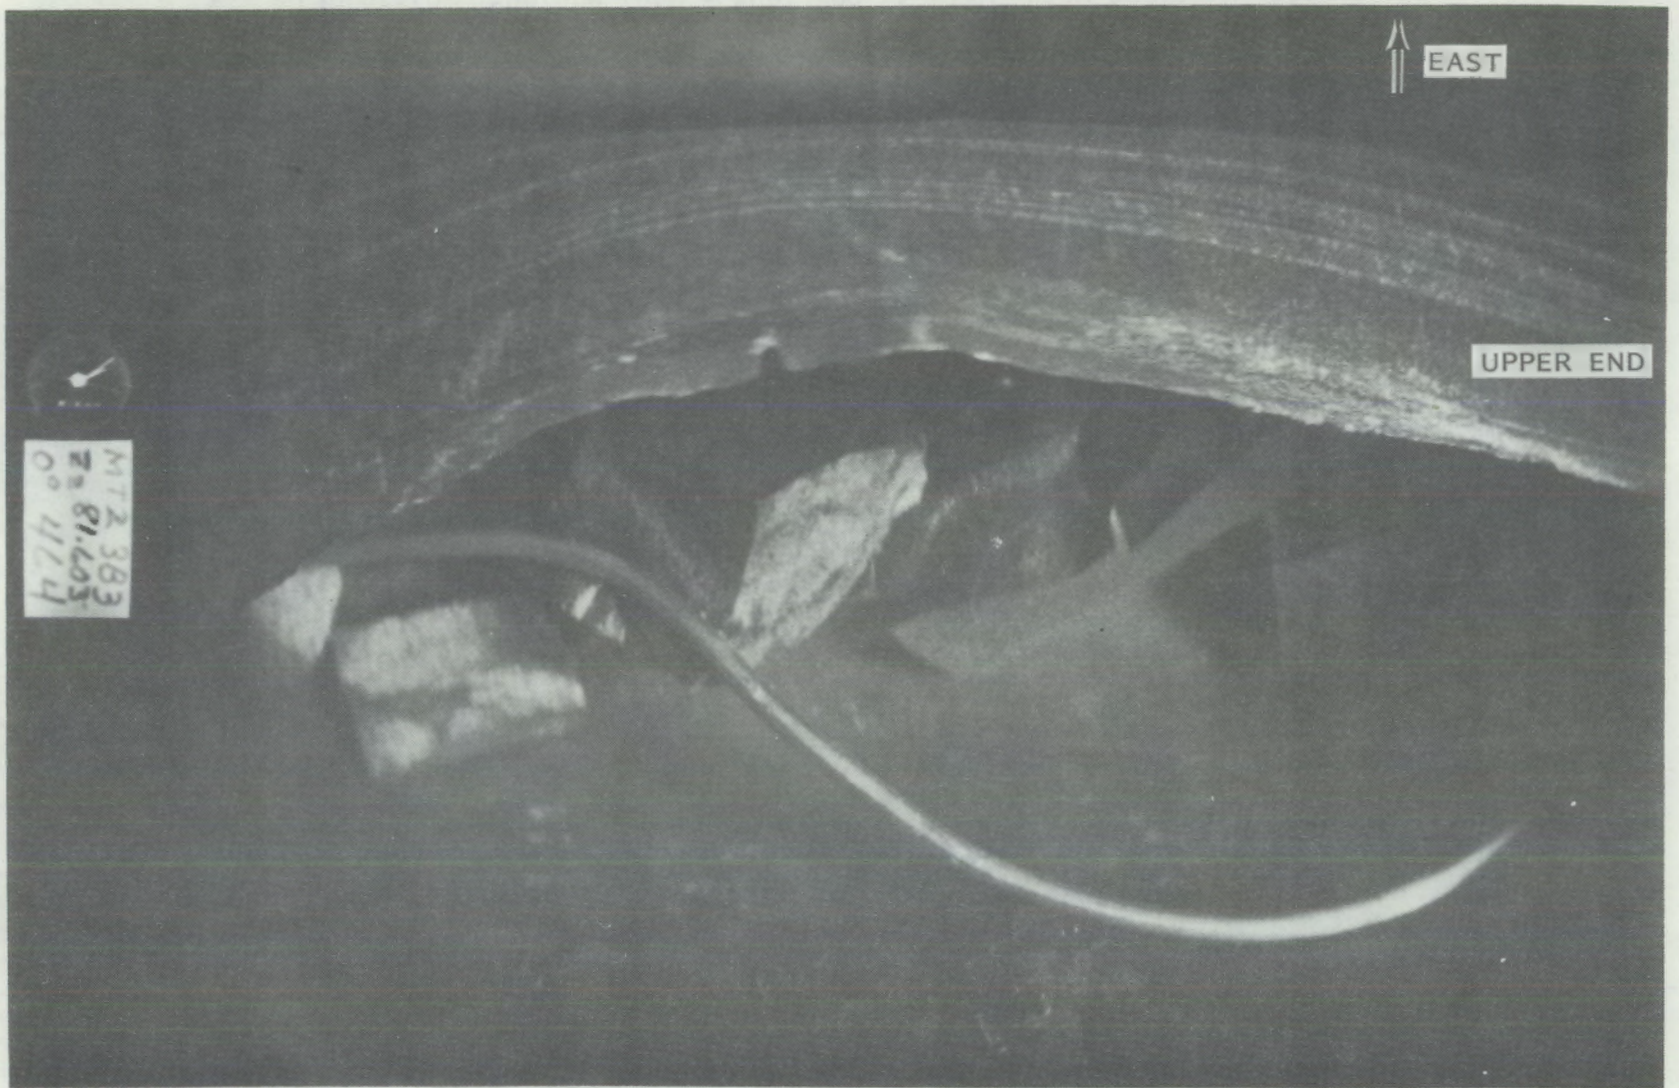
Rupture Zone - Fuel Rod 3E, 180° View Angle, 0° Side
